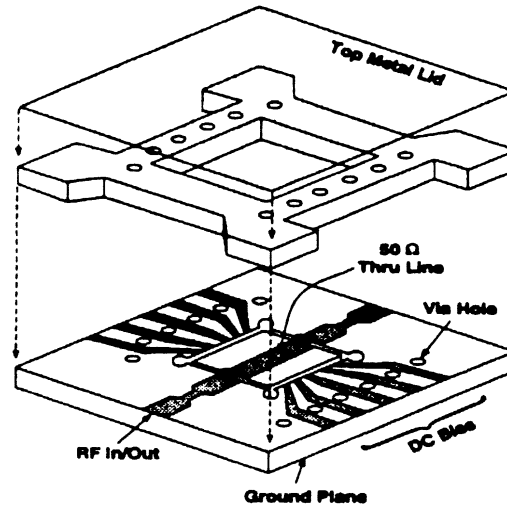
Schematic drawing of K/Ka-Band package for phase shifter chip. Courtesy of Yook [58].
